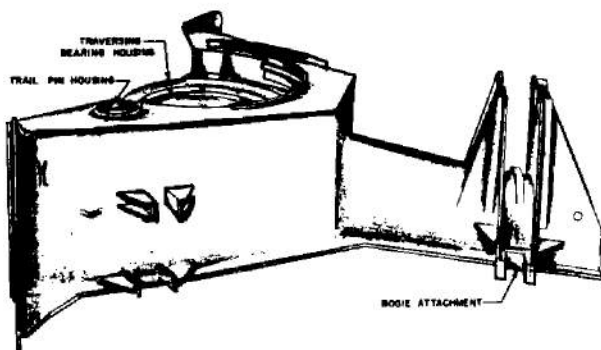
BOTTOM CARRIAGE, SINGLE RECOIL TYPE
